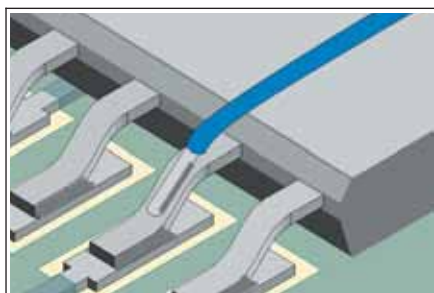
Not Recommended Wire soldered to component lead, wire over component.
